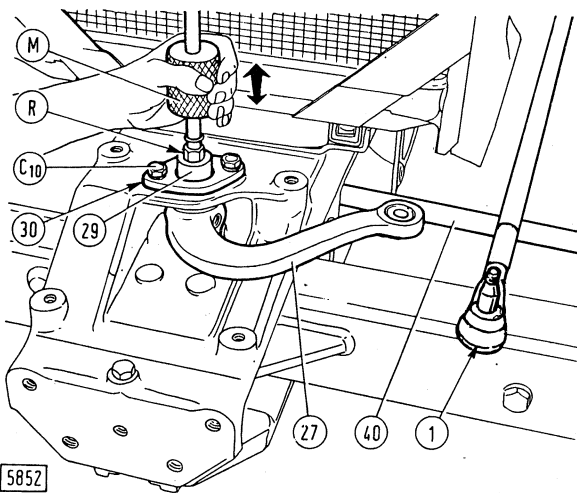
Removing the steering lever (27) pivot (29). C₁₀. Flange (30) cap screws. - M. Sliding-weight type puller A 147022 ter/A. - R. Reduction A 147022 ter/D. - 1. Drag link. - 30. Upper bushing flange. - 40. Tie-rod.
